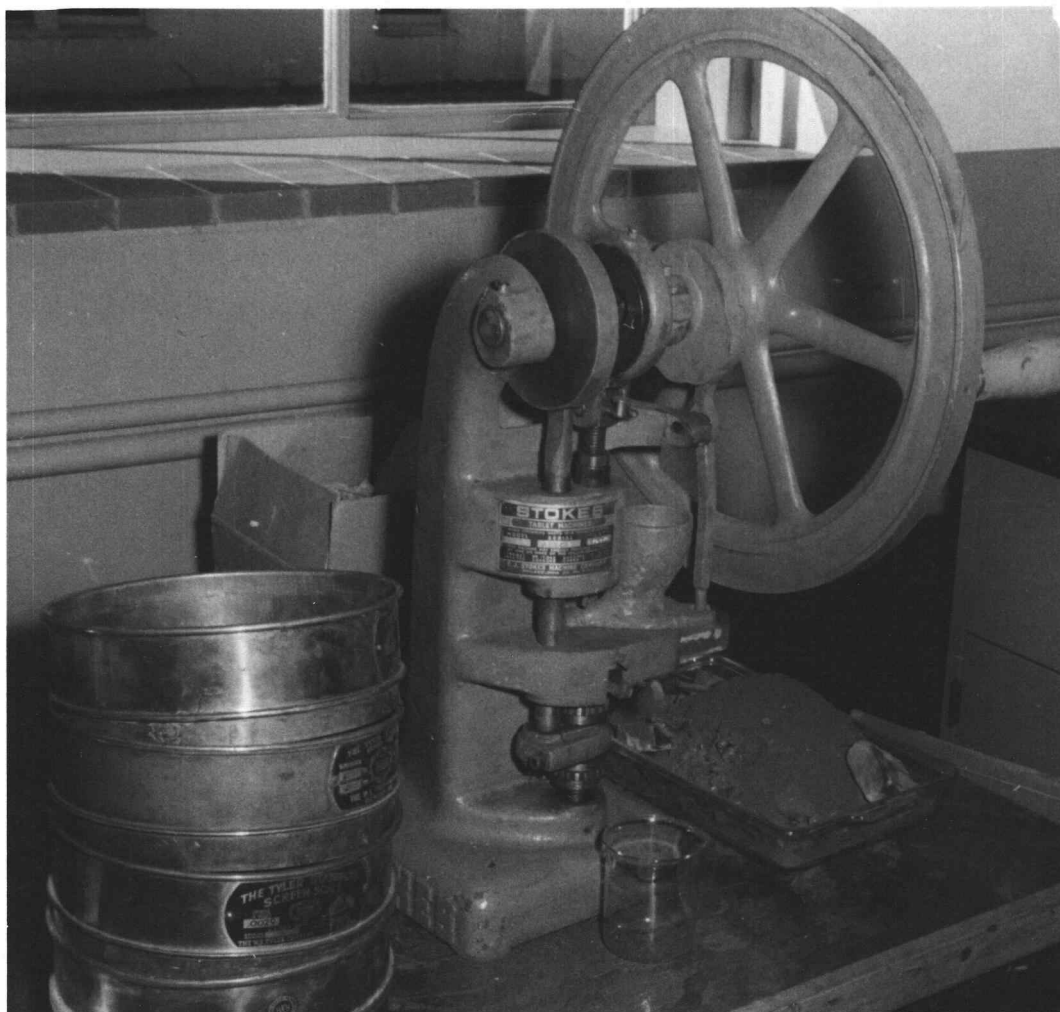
Stokes tableting machine used to prepare boron for feeding.
